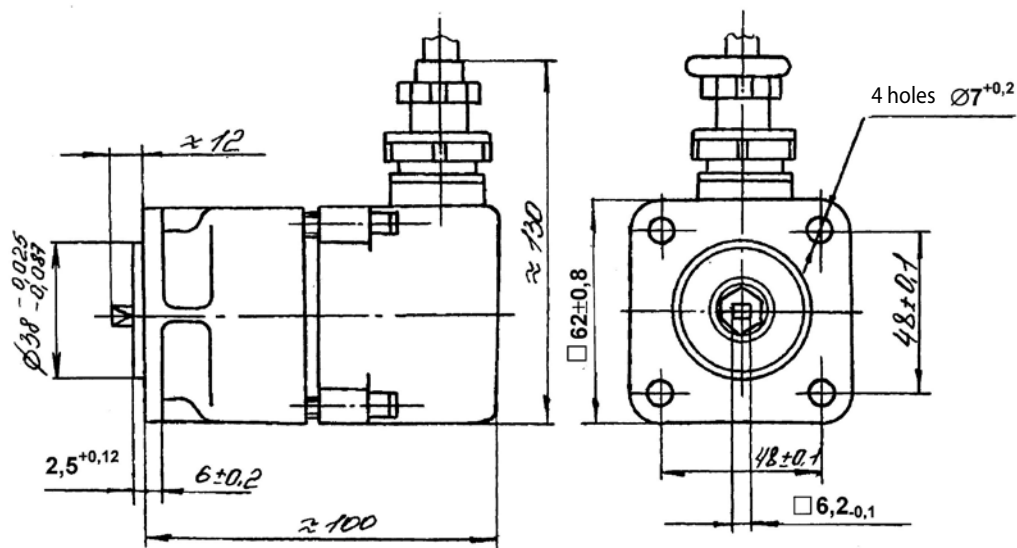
Overall dimensions of Д-1ММ, Д-2ММ primary transducers
